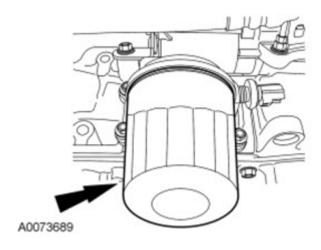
Locating Engine Oil Filter Courtesy of FORD MOTOR CO.
